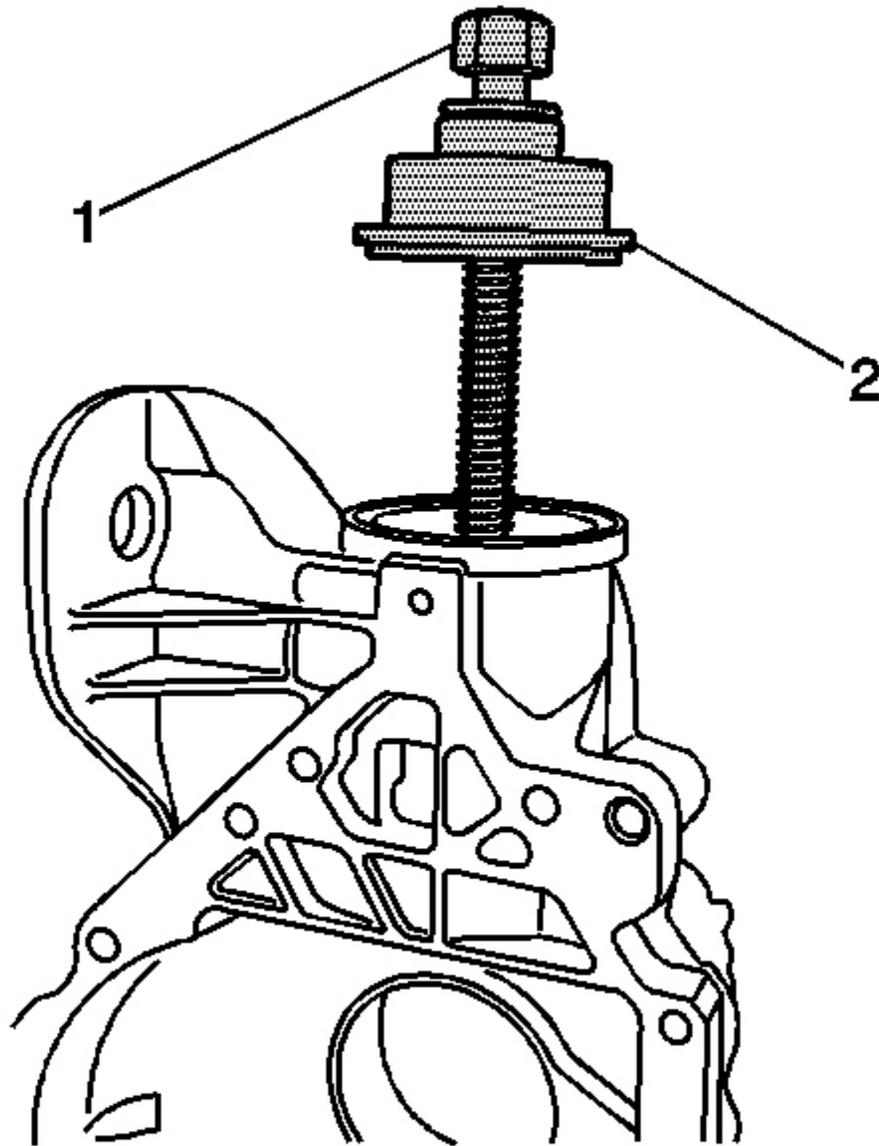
Installing J 45754-2 & Forcing Screw Over Outer Pinion Bearing Cup Bore
